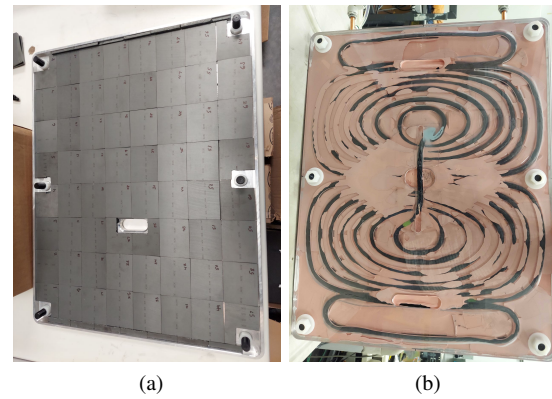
Construction of the Gen. 2 120 kW coil assemblies. (a) Ferrite layout and numbering of one of the Gen. 2 coil assemblies. (b) Frontside of a cured Gen. 2 coil.
